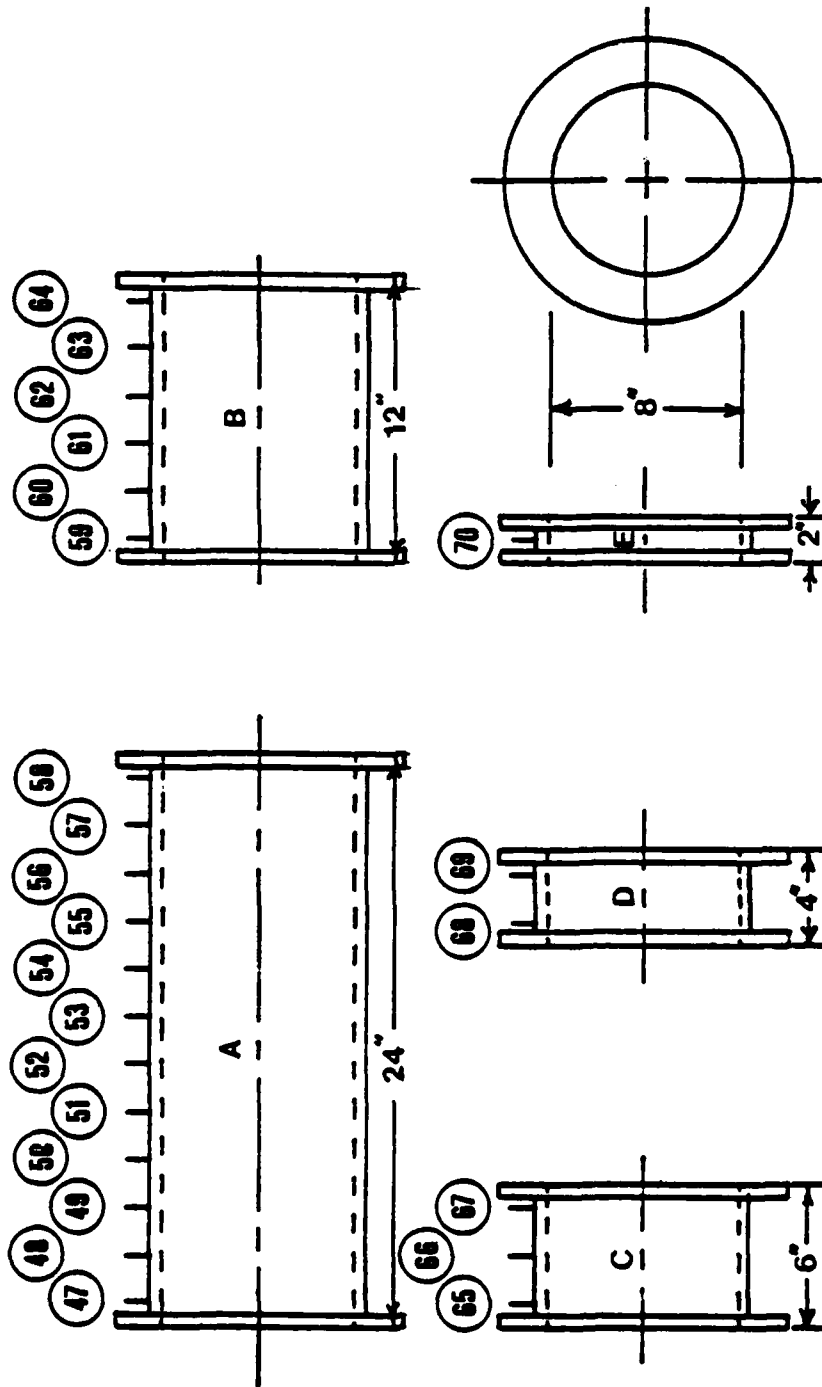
Multiple Sections of Outside Wall and Static Pressure Tap Locations
